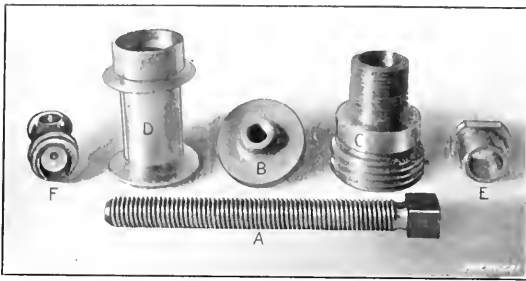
Collection of Pieces economically produced on the "Acme" Multiple-spindle Automatic Screw Machine
